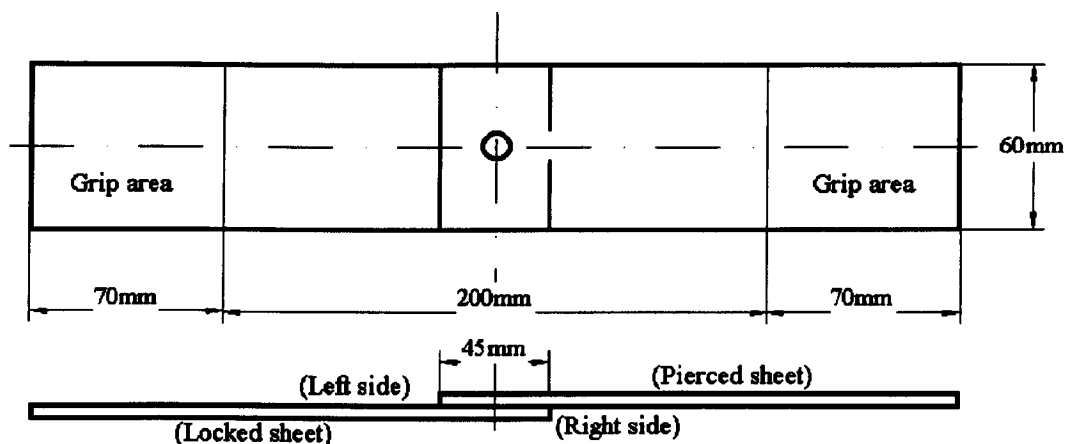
Specimen Geometry for the Shear and the Fatigue tests
